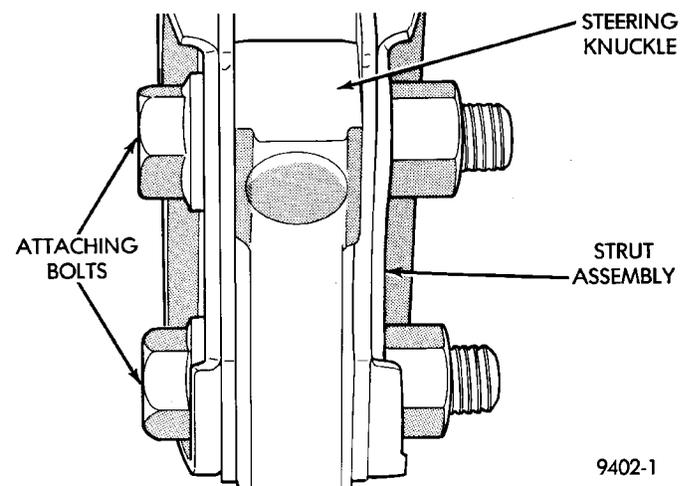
Strut To Steering Knuckle Attaching Bolts
